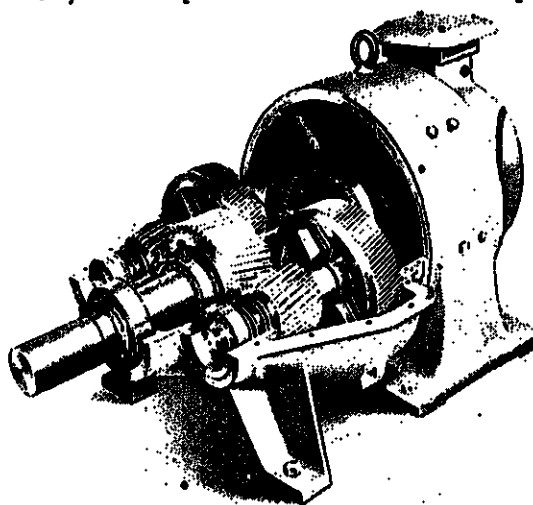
D.C. motor type K, with double gear type VD. (Upper half of gear casing removed).
